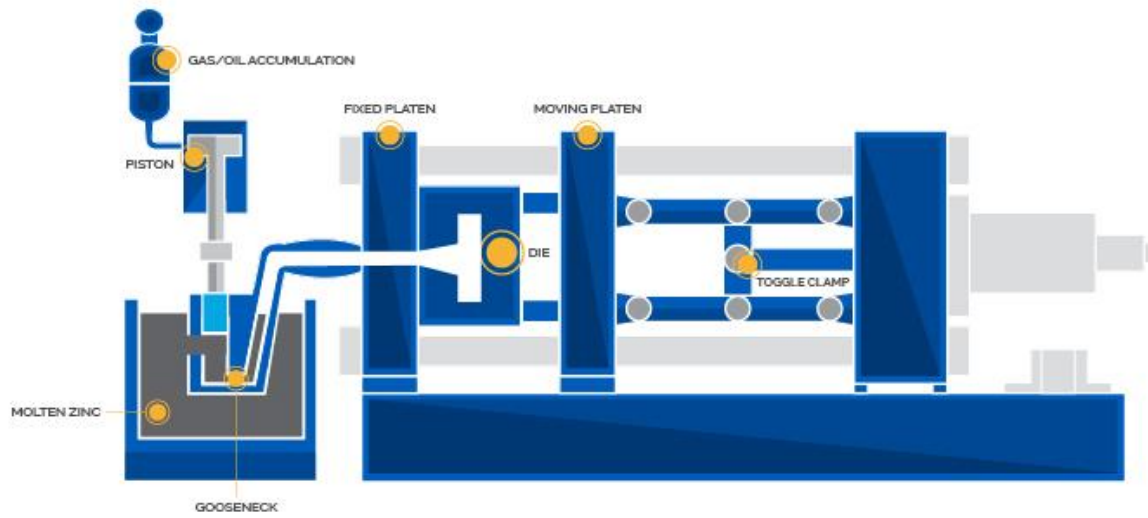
Component view of major hot chamber systems (*Hot Chamber Die Casting*, 2021)
